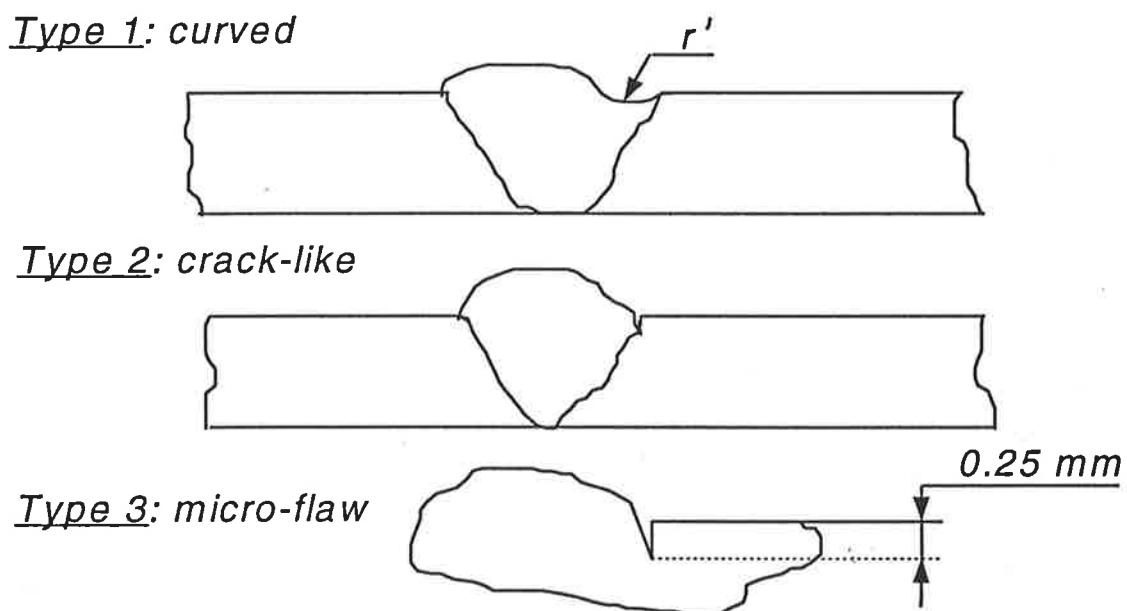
A classification of undercuts at the weld toe of butt-welded joints
